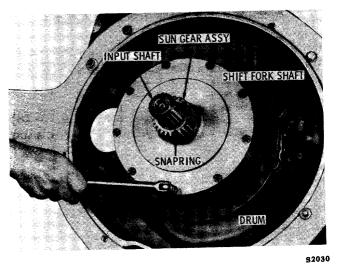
Removing bolts from input splitter carrier sun gear assembly (VS2 series)
